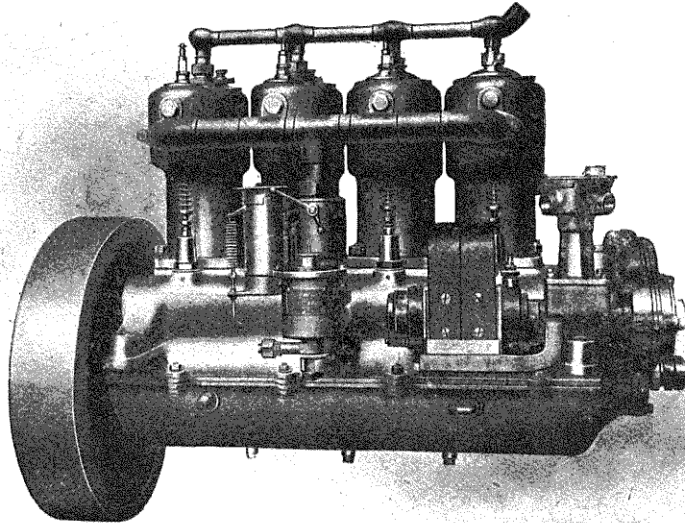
Four-cylinder "Bayard" engine (side view).
